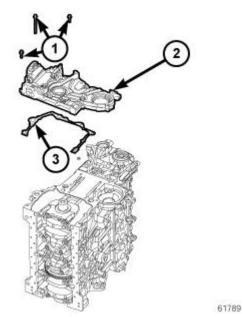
Front Cover & Gasket Courtesy of CHRYSLER LLC
